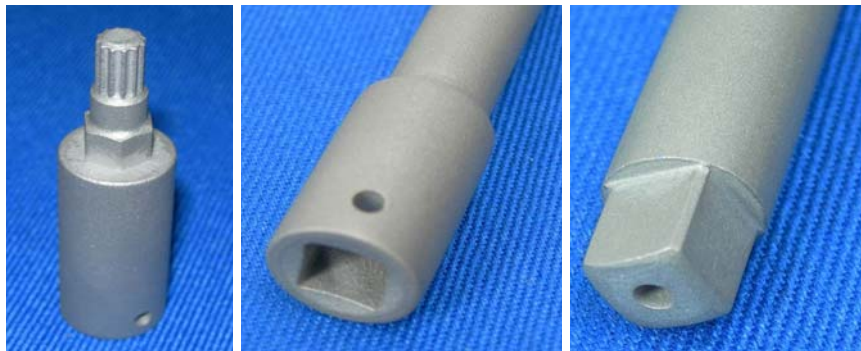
BIT M5 XZN and 1/4" BIT Holder in 1 piece (left); Tool extension details (center & right)
